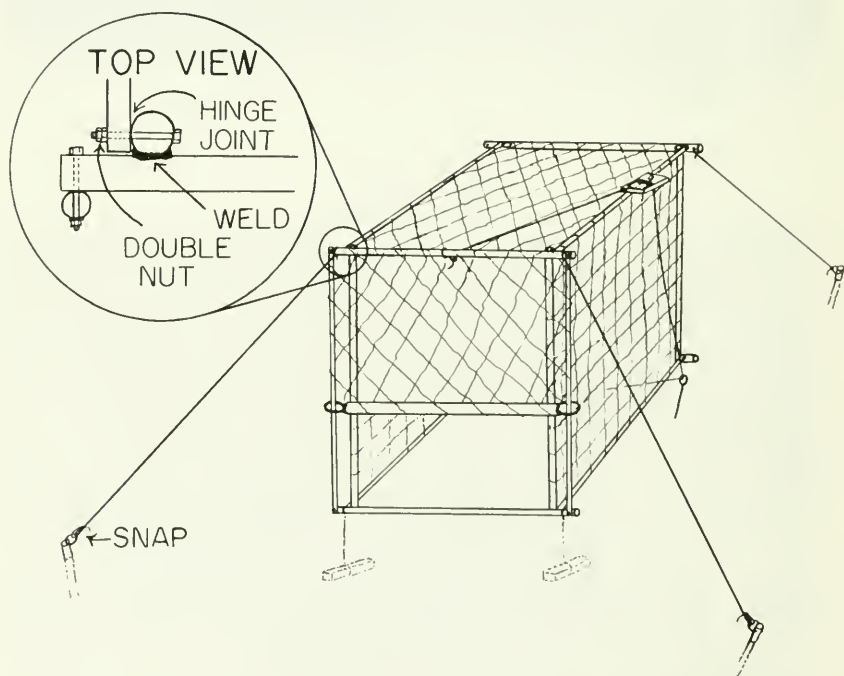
Diagram of the collapsible deer trap, showing general construction and set-up of the trap. The inset shows detailed construction of the corners. Both pipe frame end pieces are constructed identically for complete interchangeability; however, drop bar guides are bolted only to the drop gate end.
